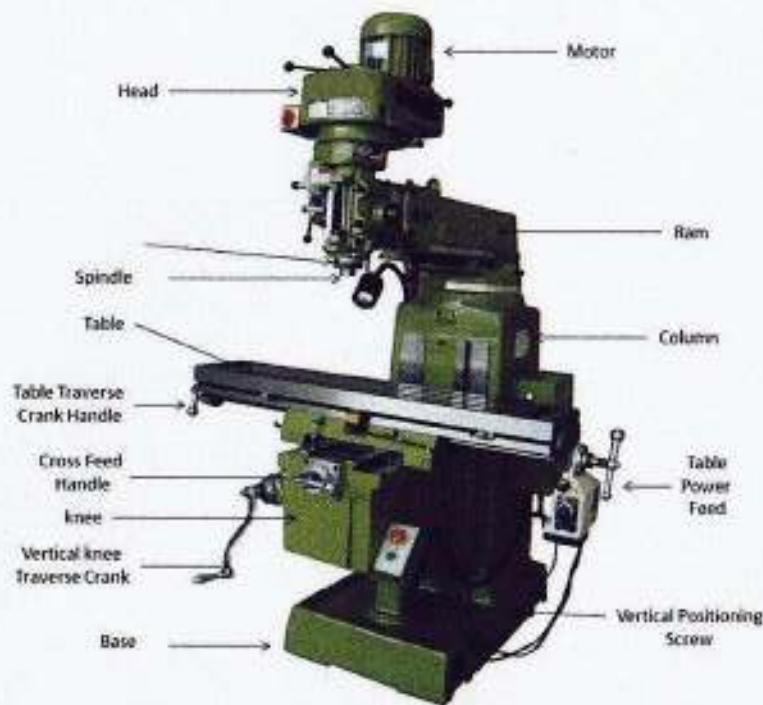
Milling machine (Image Courtesy: mech4study.com)
